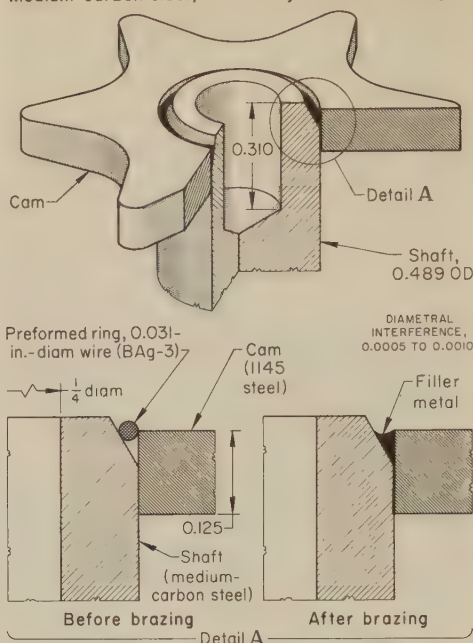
Induction brazed cam and shaft that had to be assembled with a press fit to maintain concentricity (Example 588)
